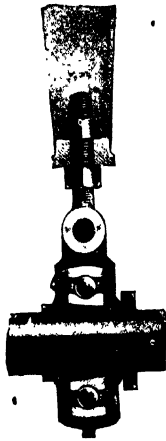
BALL-BEARING, HANGER TYPE, FOR LINE SHAFTING. [Hoffmann.]
